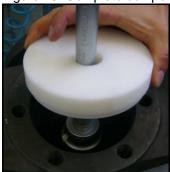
Nozzle assembly tool Figure 17: Nozzle assembly tool
